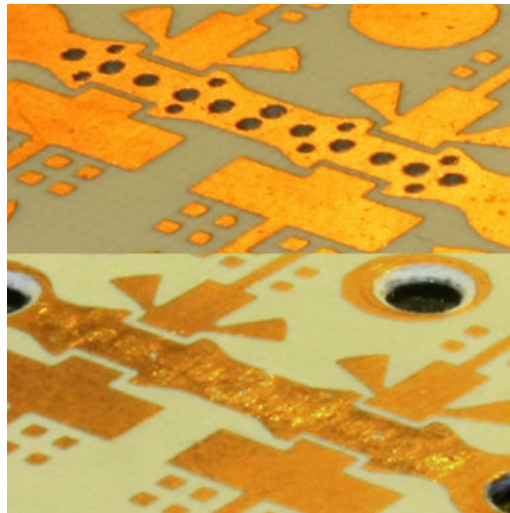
Process of fabricating copper filled via holes in the printed circuit board to create a good heat sink and ground.
